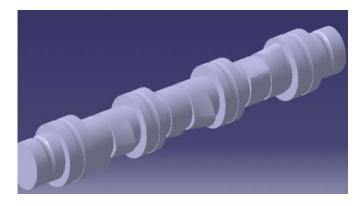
MODIFIED Iso-metric view of CAM SHAFT
